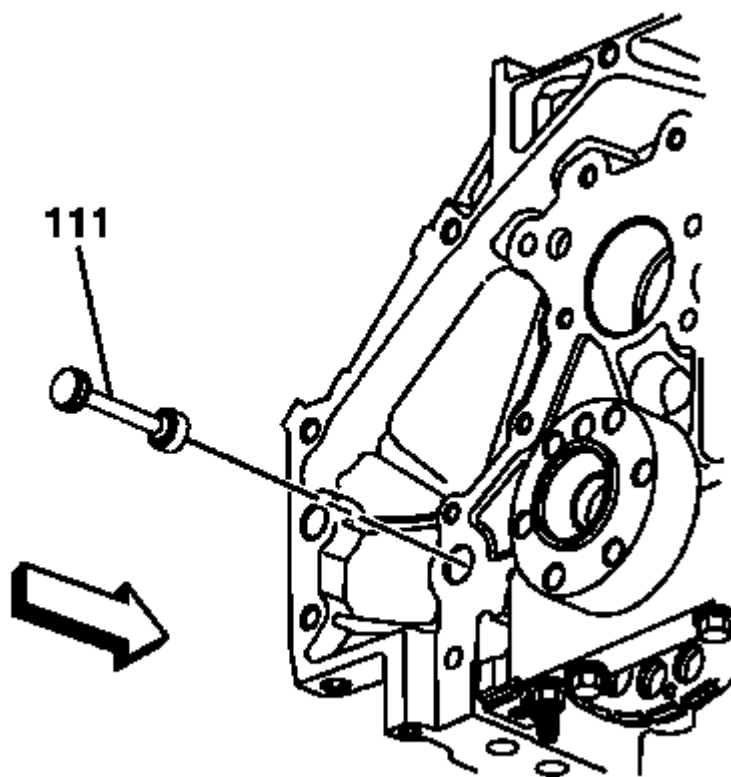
Engine Block Rear Oil Gallery Plug & Seal
